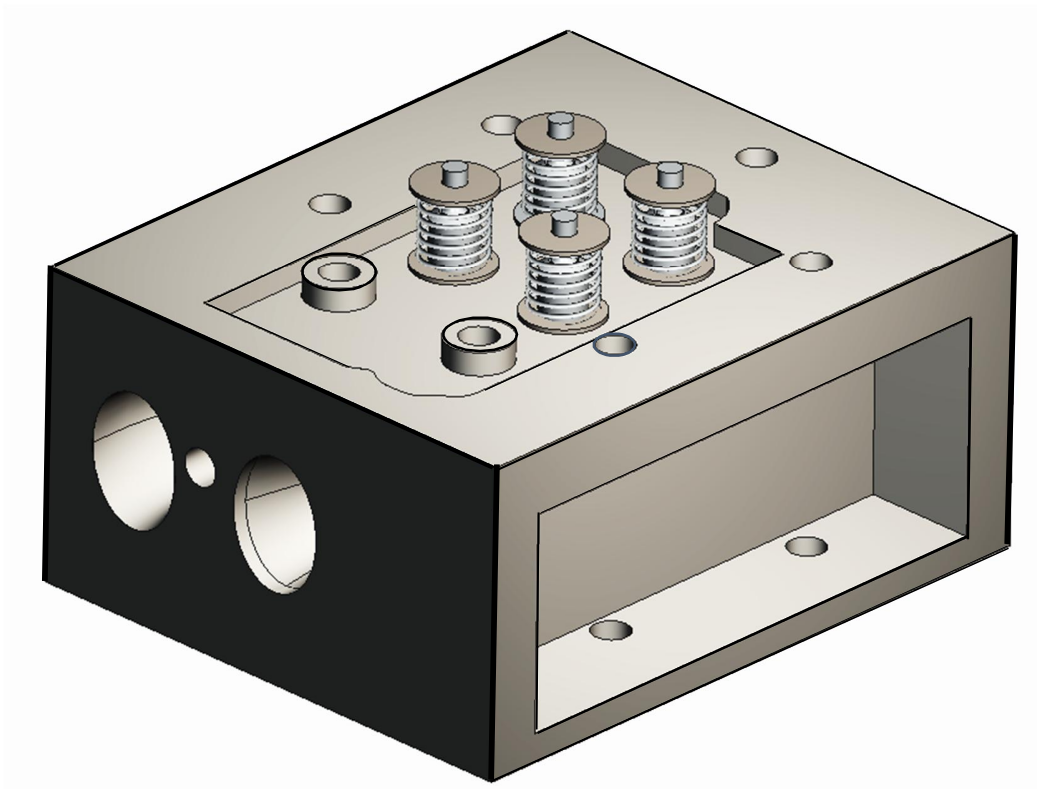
Isometric view of completely designed cylinder head with attached springs, washers and valve guides
